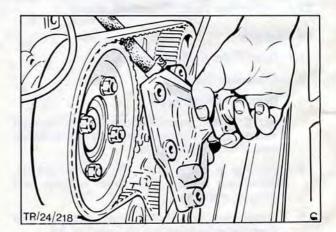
Fitting the water pump assembly, (connect hose before positioning pump)
